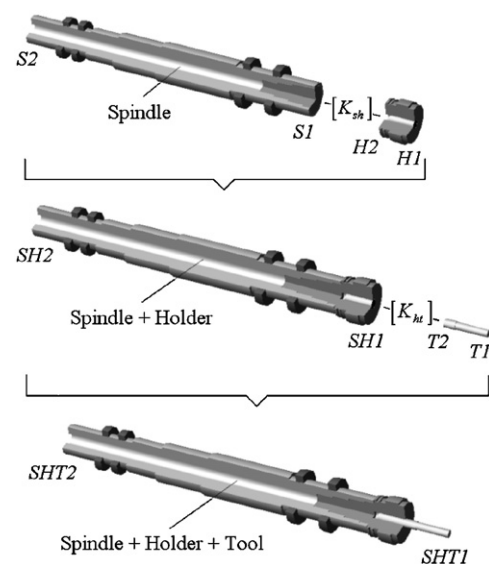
Components of spindle–holder–tool assembly and the complex stiffness matrices of spindle–holder and holder–tool interfaces.
